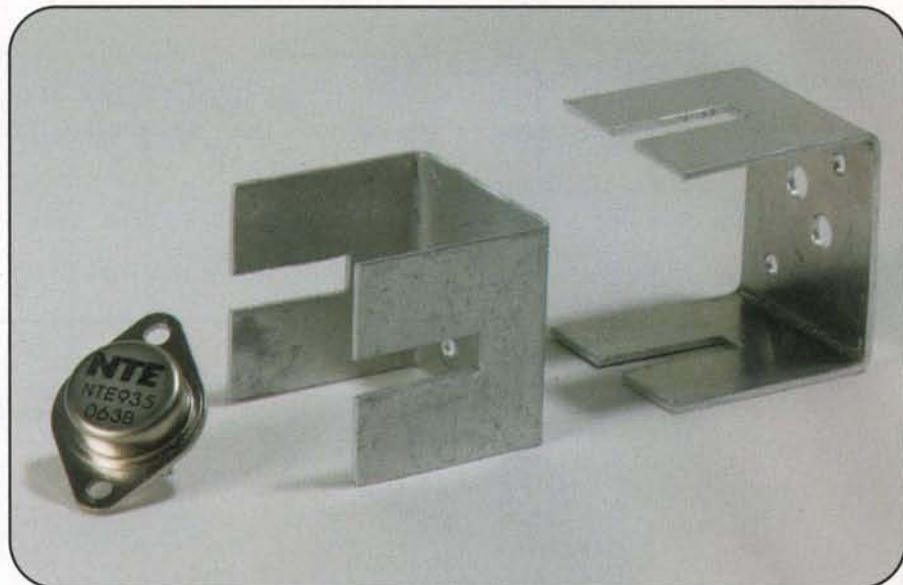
regulator and its home-brew two-section heat sink ready for assembly.
